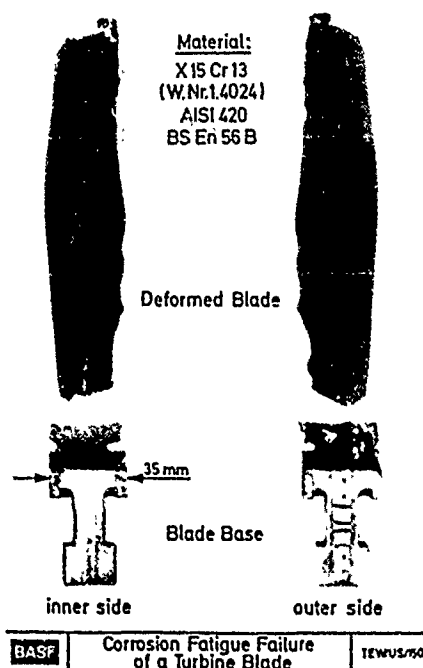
Superposition of corrosion fatigue and pitting corrosion (Mode IV corrosion fatigue: view of failed blade).
